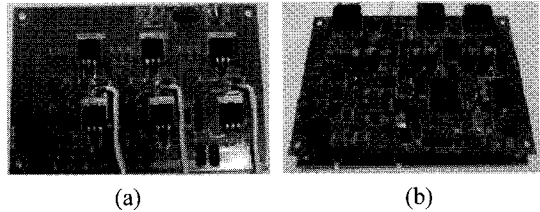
Implemented motor driver for PADW; (a) MosFET inverter module with metal PCB and (b) control part
